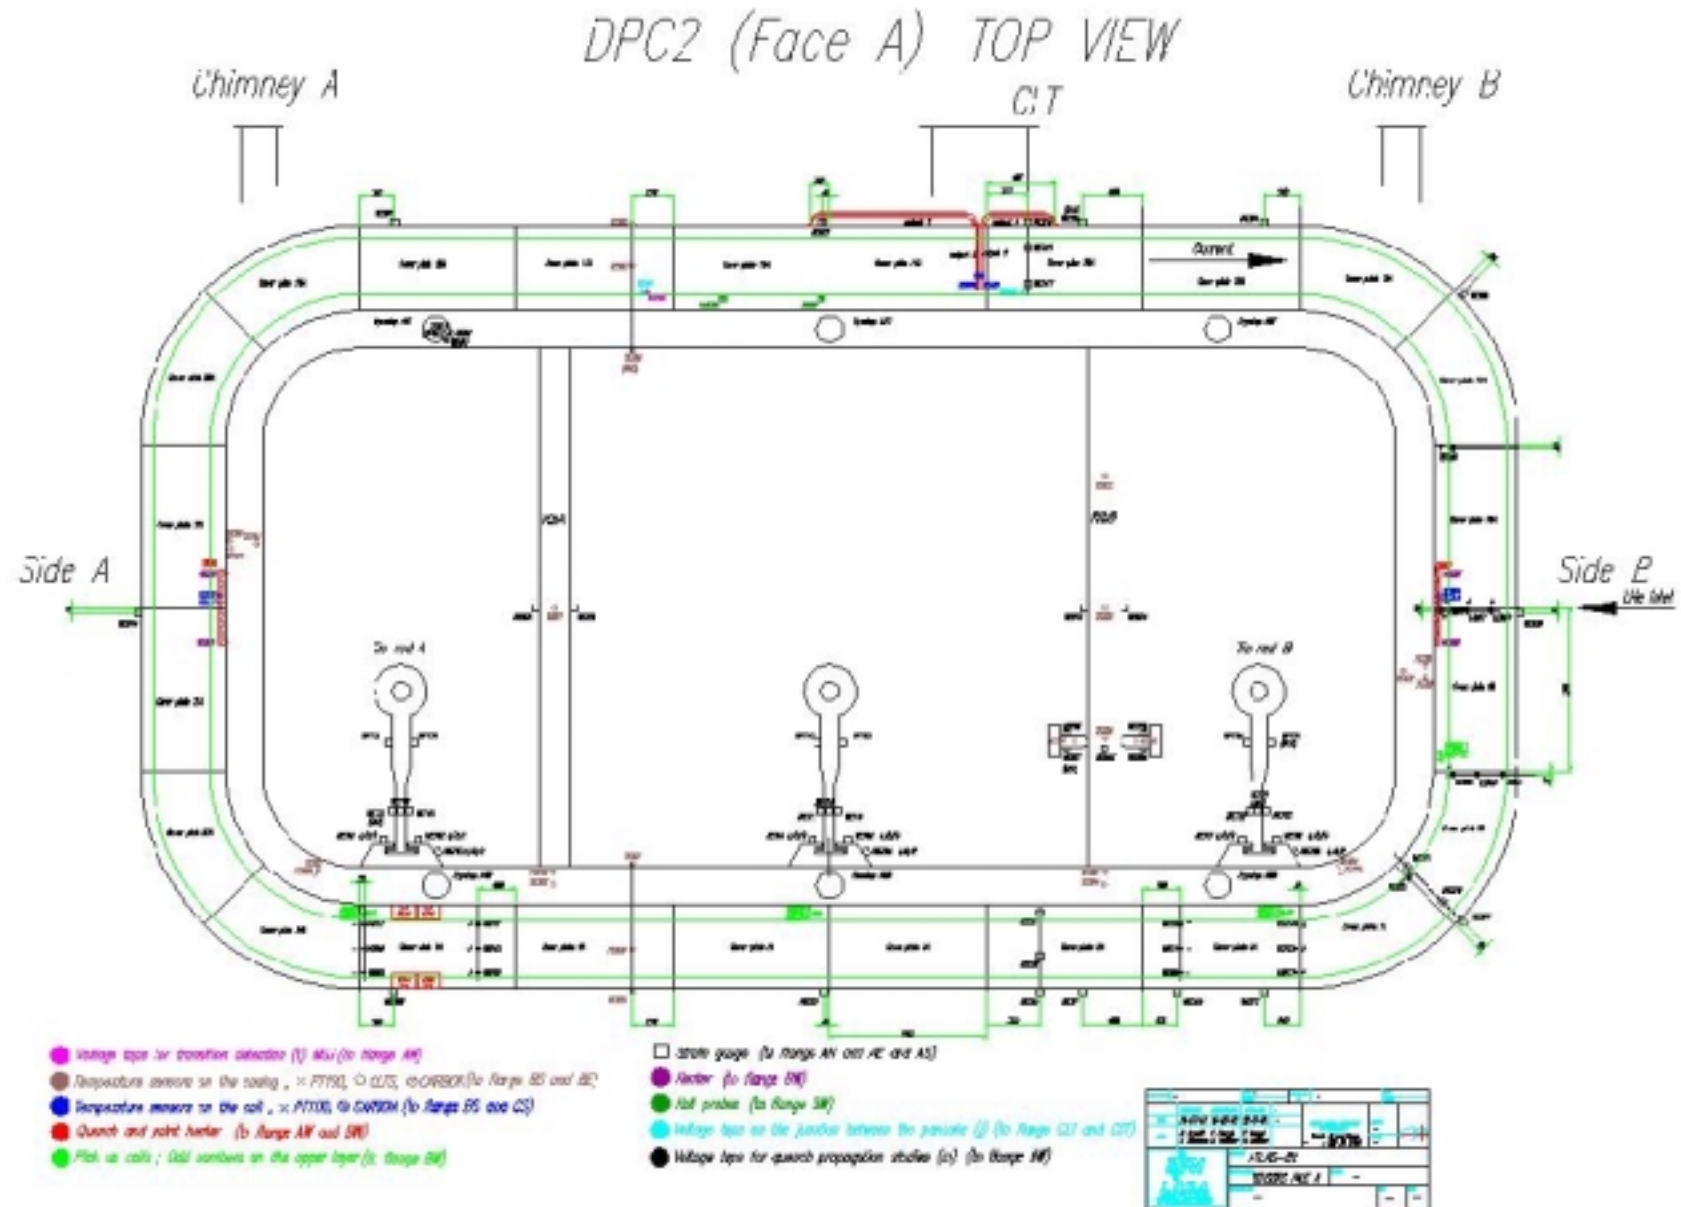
Scheme of the sensor positions on the face A of the B0 coil casing.
